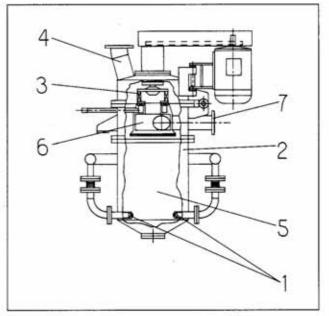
Schematic illustration of the Fluidized Bed Jet Mill CGS 1: nozzles; 2: grinding chamber; 3: classifier rotor; 4: feed chute; 5: particle bed ("fluidized bed"); 6: expansion chamber; 7: fine material outlet
